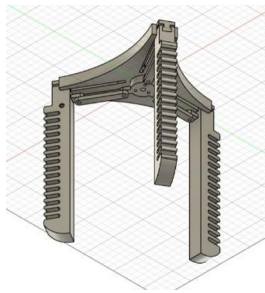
CAD model of the pneumatically actuated soft robotic gripper showing the three ribbed flexible fingers and the synchronized linkage mechanism in isometric view.
